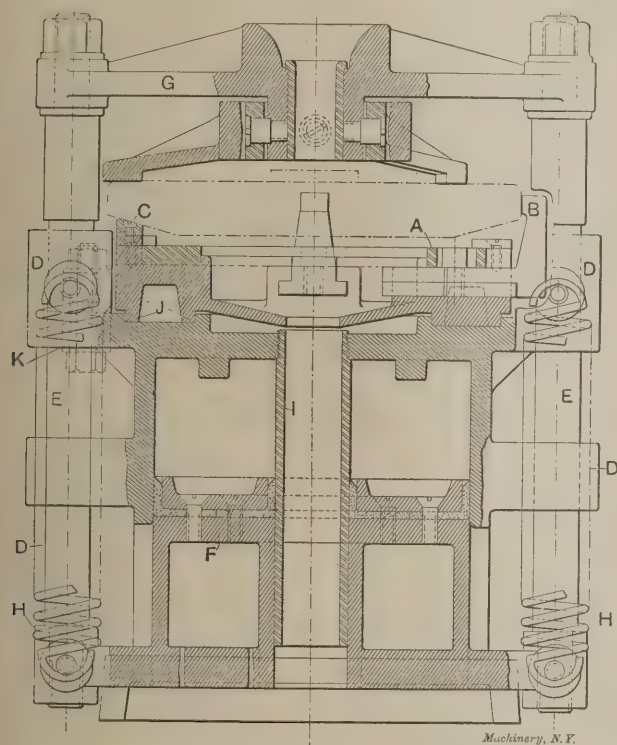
Vertical Section, Pneumatic Clamping Jig for Work on Agricultural Machinery.
